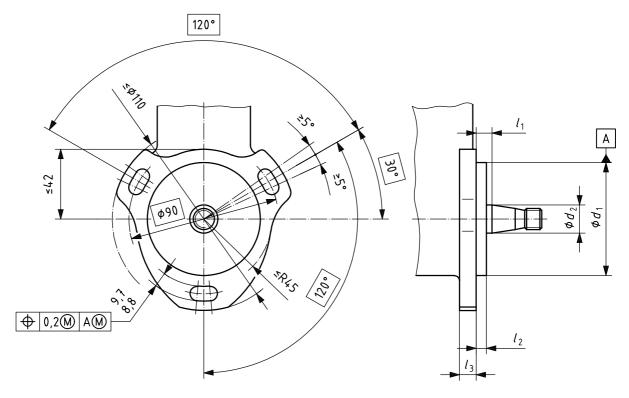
Fuel injection pumps — Type 4 end-mounting flange
